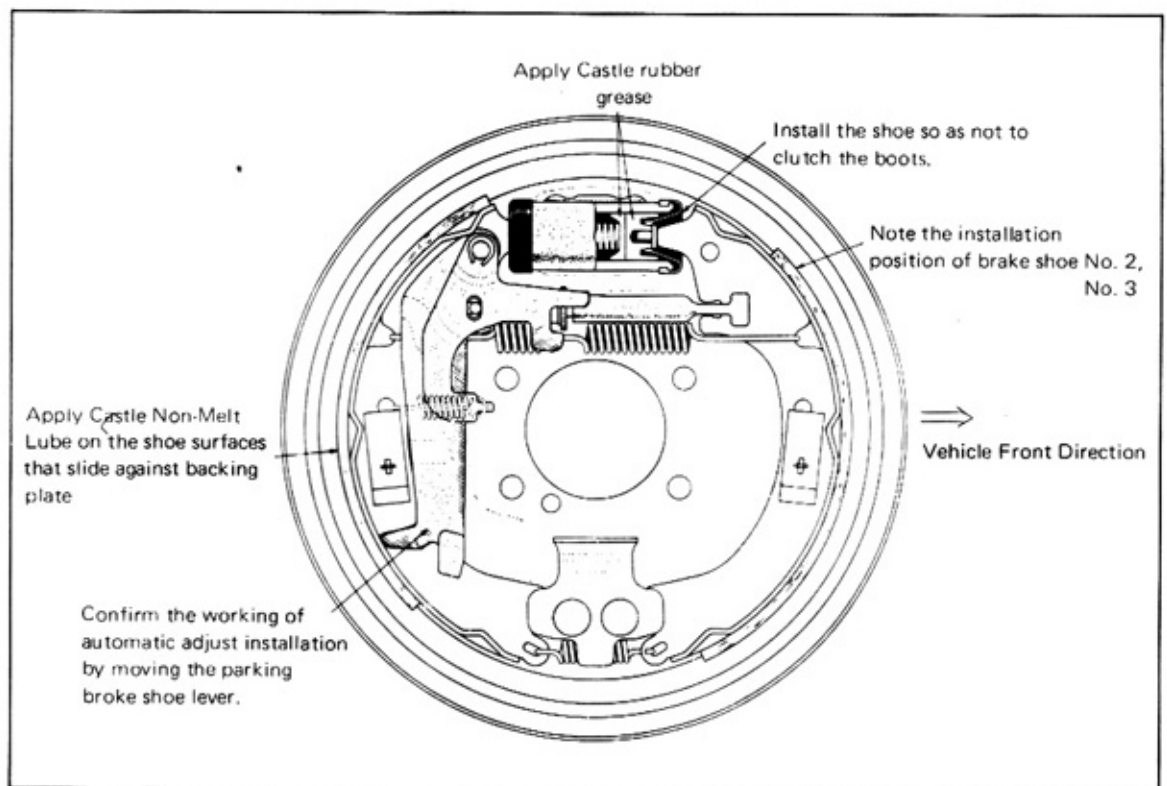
Rear Brake Shoe Installation (RH shown)
